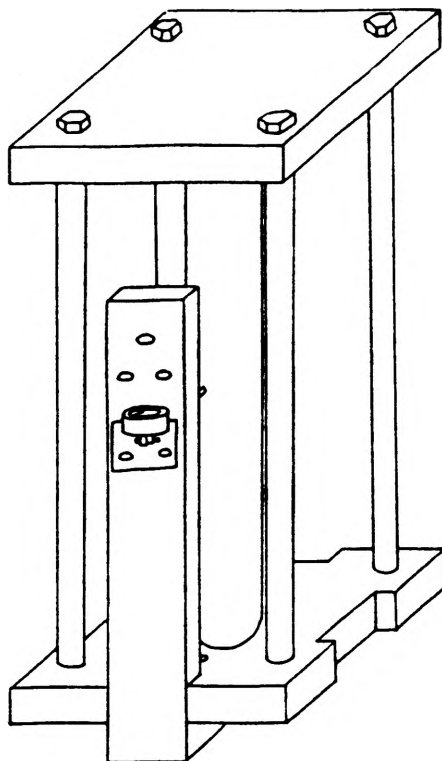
Partially Assembled Fixture for Thermal Buckling Test
